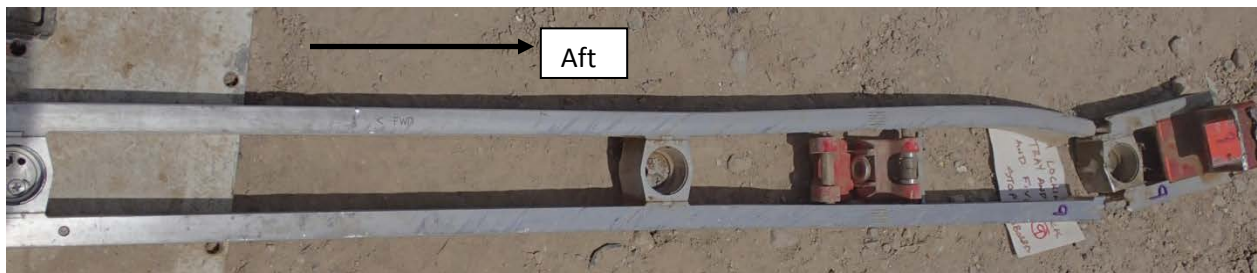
P29 Aft Lock Tray (9) fixed and retractable end stops
